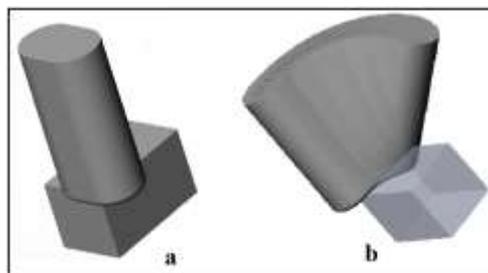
Radius end mill cutter moving through work piece (a) 3-axis, (b) 5-axis.
